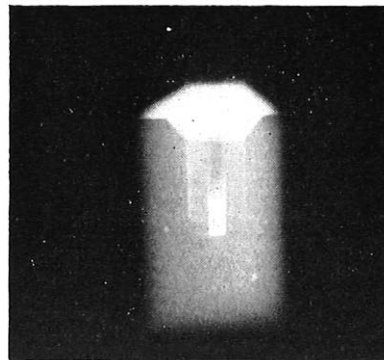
RADIOGRAPH OF A SECTIONED GAS-FILLER POST
